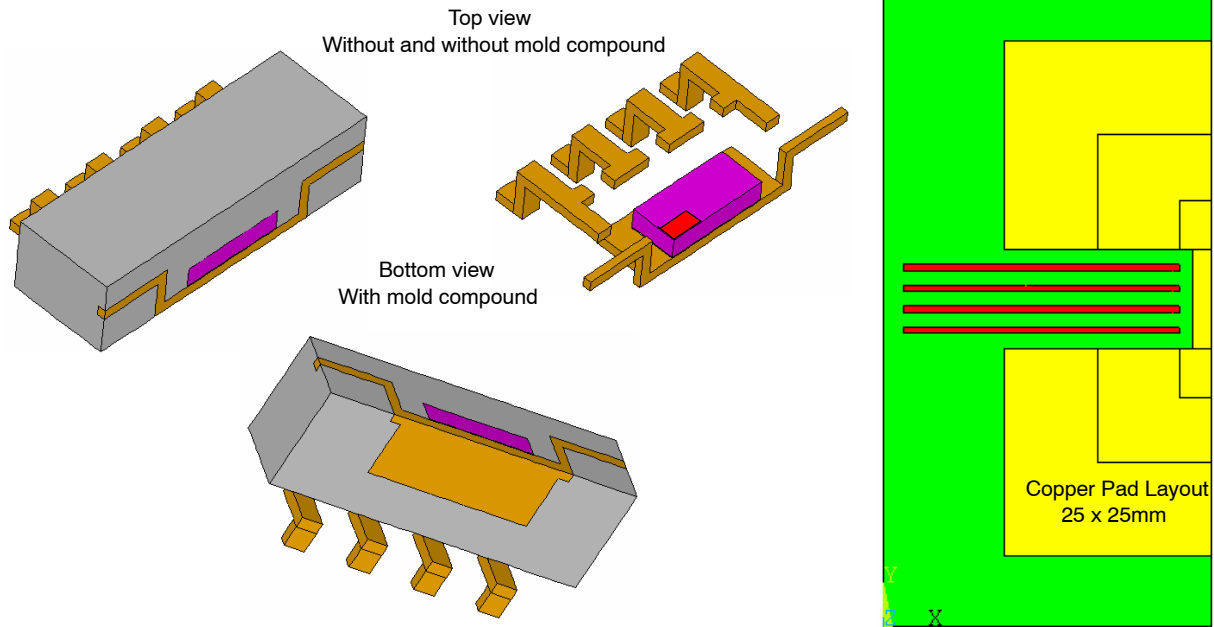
Internal Construction of the Package and PCB Layout for Multiple Pad Area
